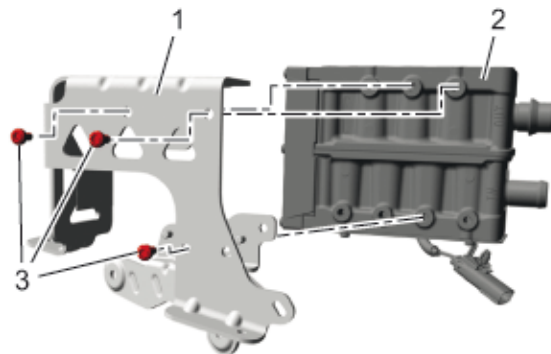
Heater Coolant Heater, Bracket And Bolts
